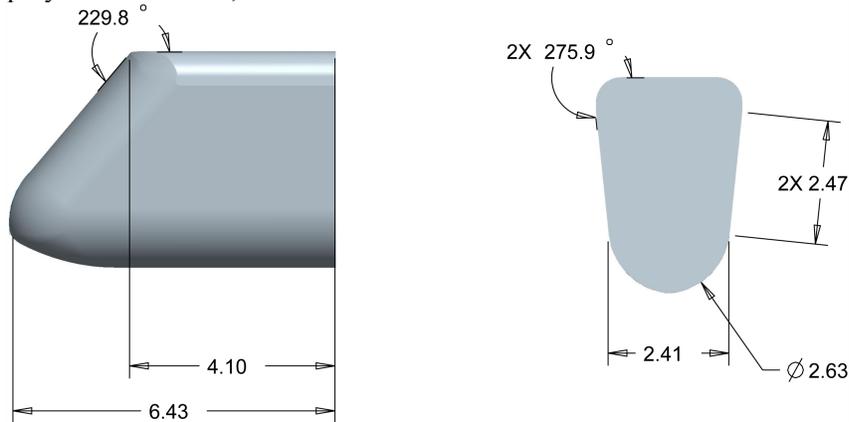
Side and rear view of the fuselage (all dimensions in inches)
